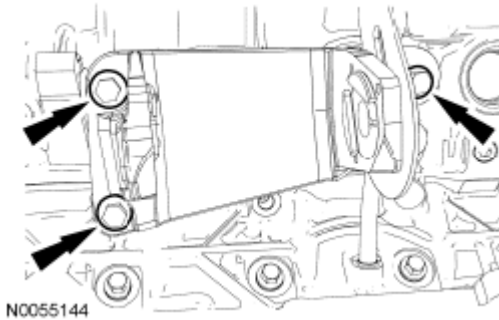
Locating LH Engine Support Insulator-To-Cylinder Block Bracket Bolts
